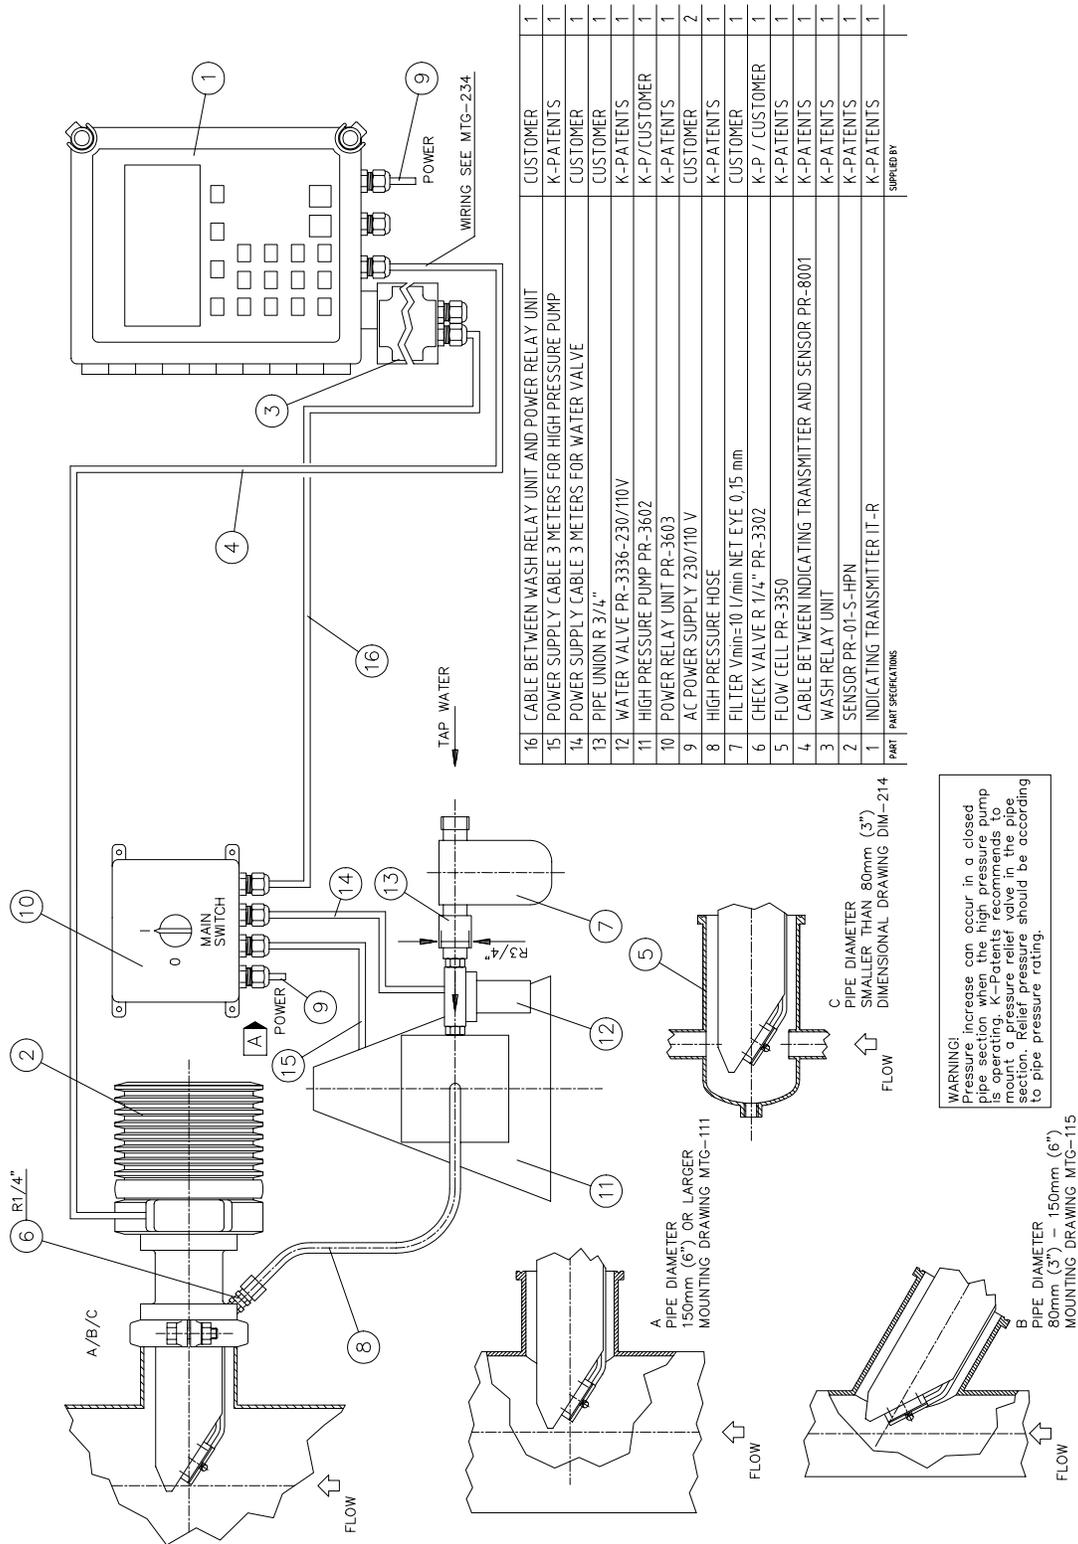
Mounting drawing for integral high pressure wash system with Wash control relay unit - WR.
